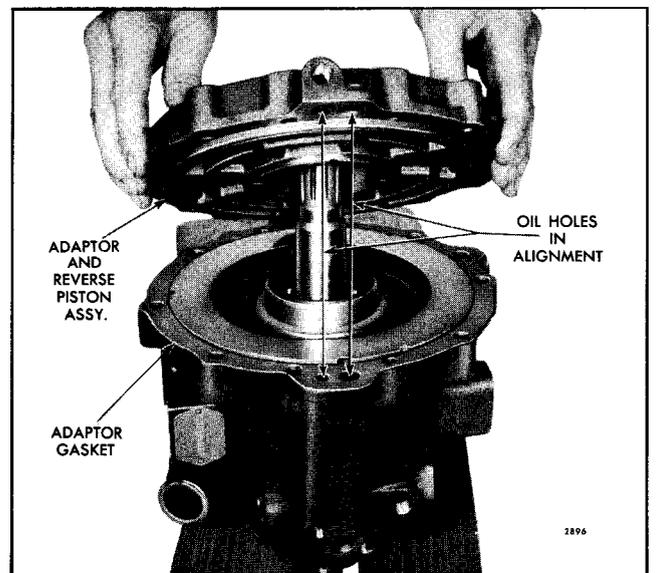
Installing Adaptor and Reverse Clutch Piston Assembly on Input Shaft and Gear Housing
